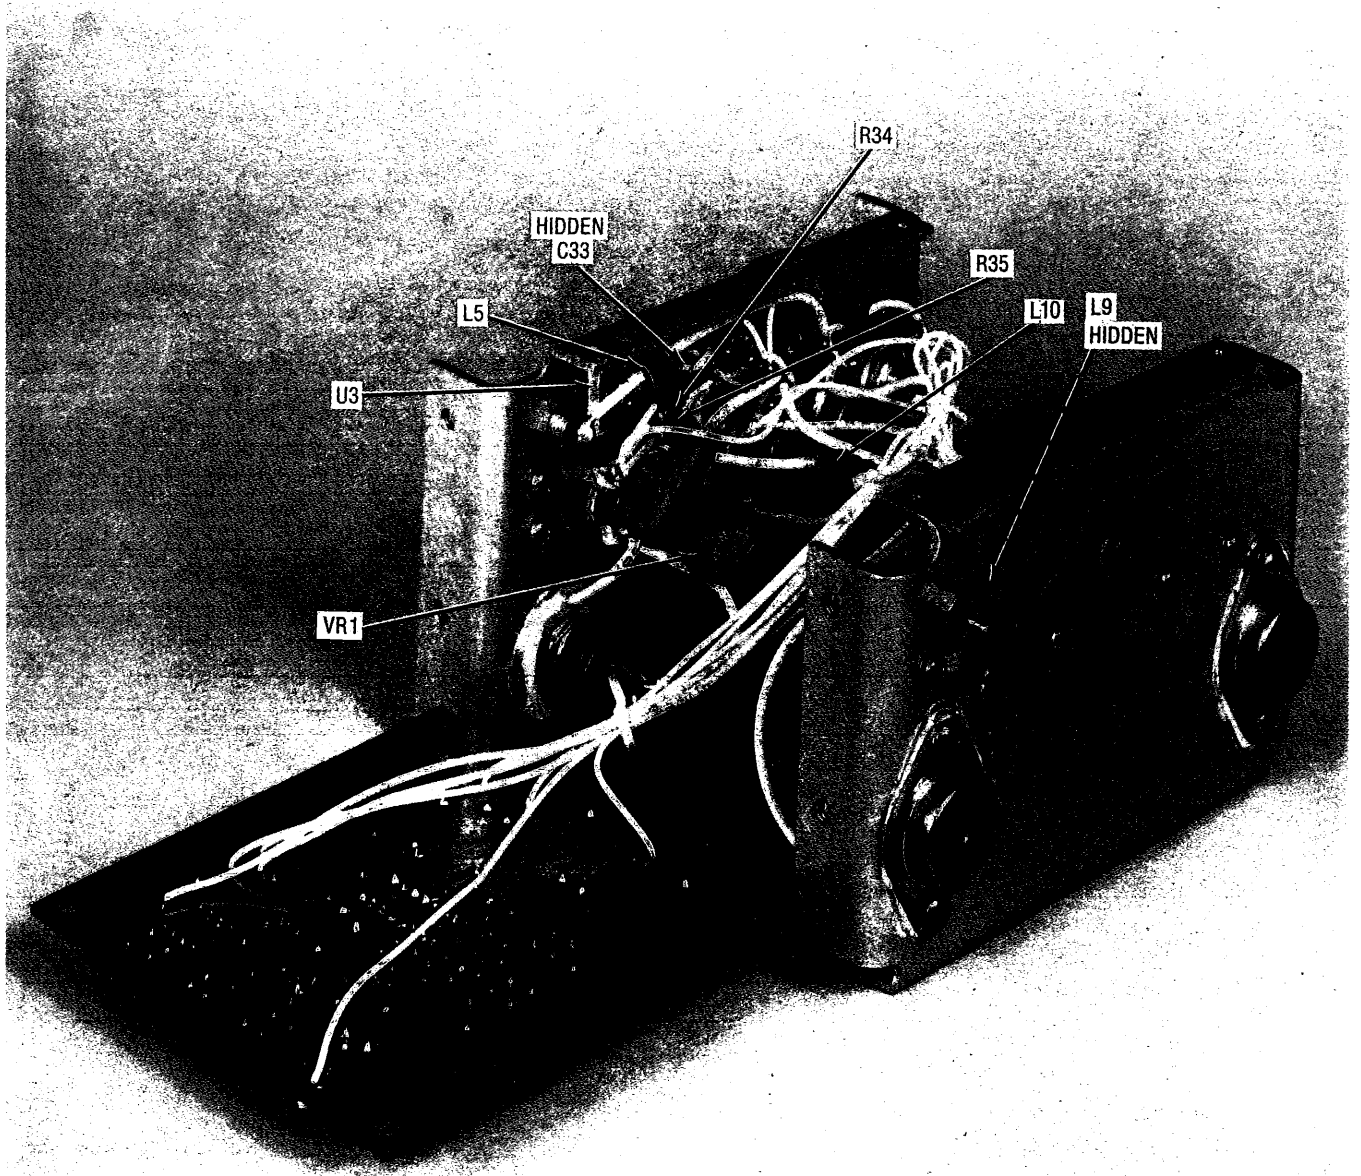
A. Converter Control Assembly Parts Location Diagram
